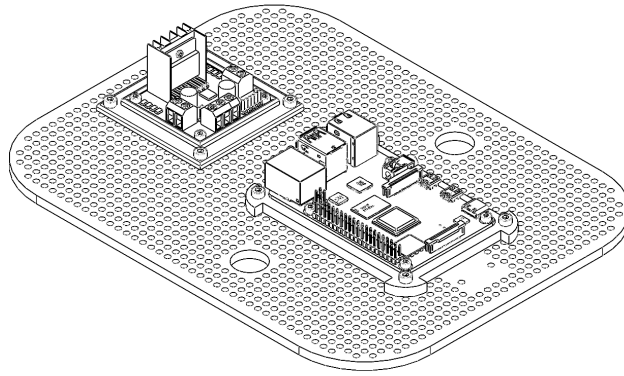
Drawing of electric mounting plate - [Engineering Drawing](#)
